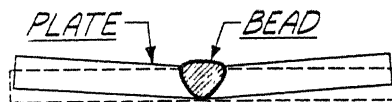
Original position of plates is indicated by dotted lines. Position after welding is shown by solid lines.
